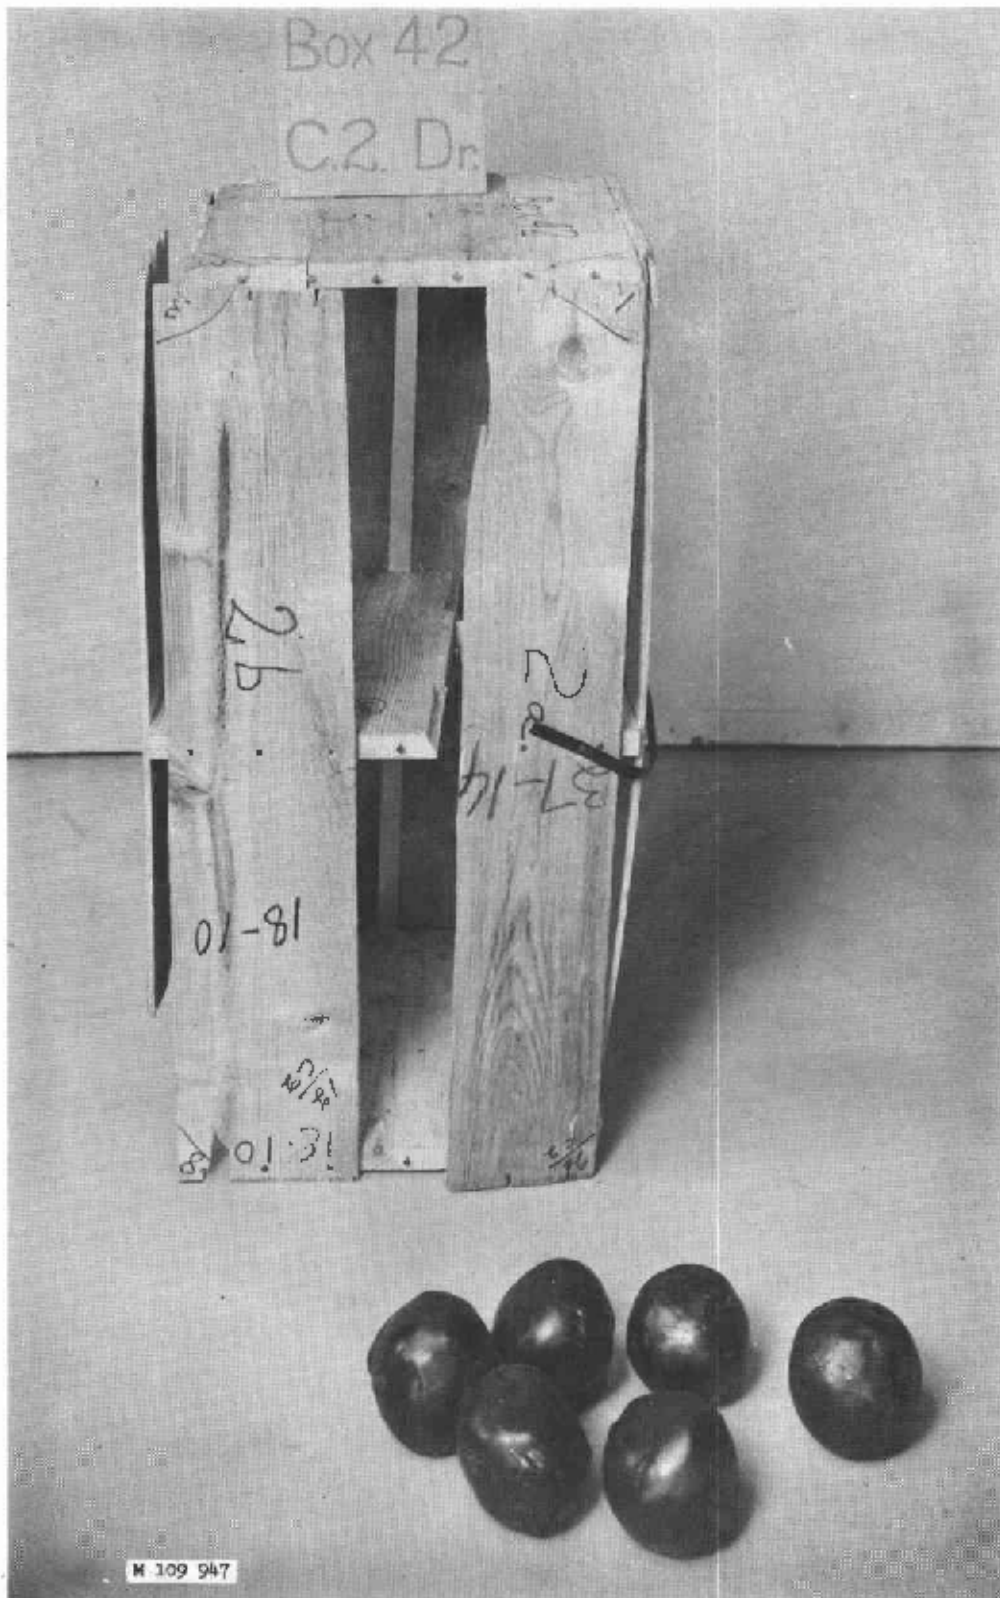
Box from group C. 2 (heated in steam, dried in kiln) subjected to cornerwise-drop test and showing shearing from nails and splitting of center between fasteners.
